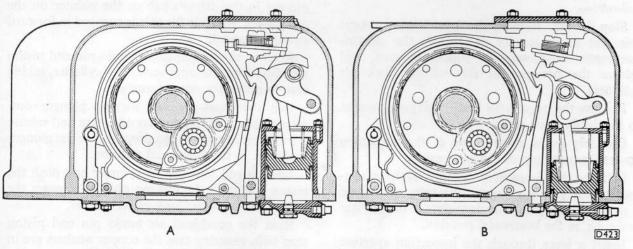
Section through gearbox showing 1st speed actuation—"A" brake on. "B" brake off.
